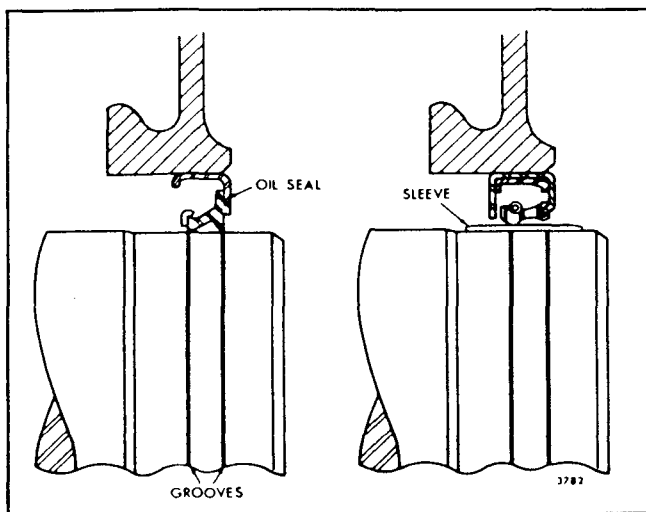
Use of Rear Oil Seal Sleeve on Grooved Crankshaft (In-line and 6V Engines)
